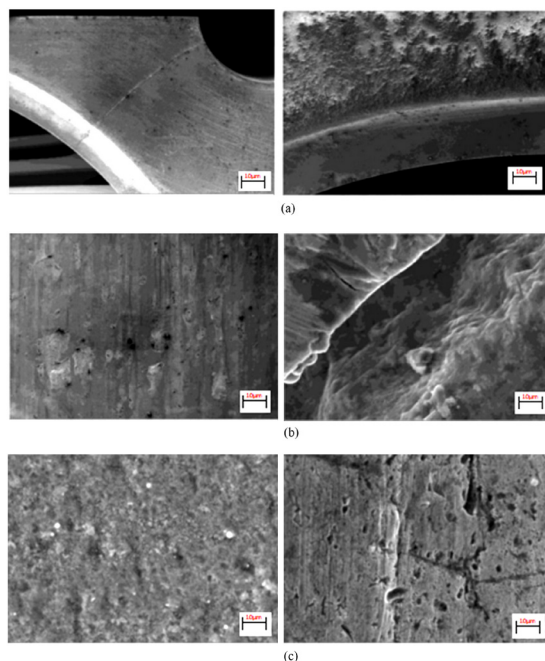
Detail of the worn form; a) Crack around the ejector and the core cavity b) Separating means on the surface of the moulded part c) Contact of the movable core and the moulded part
